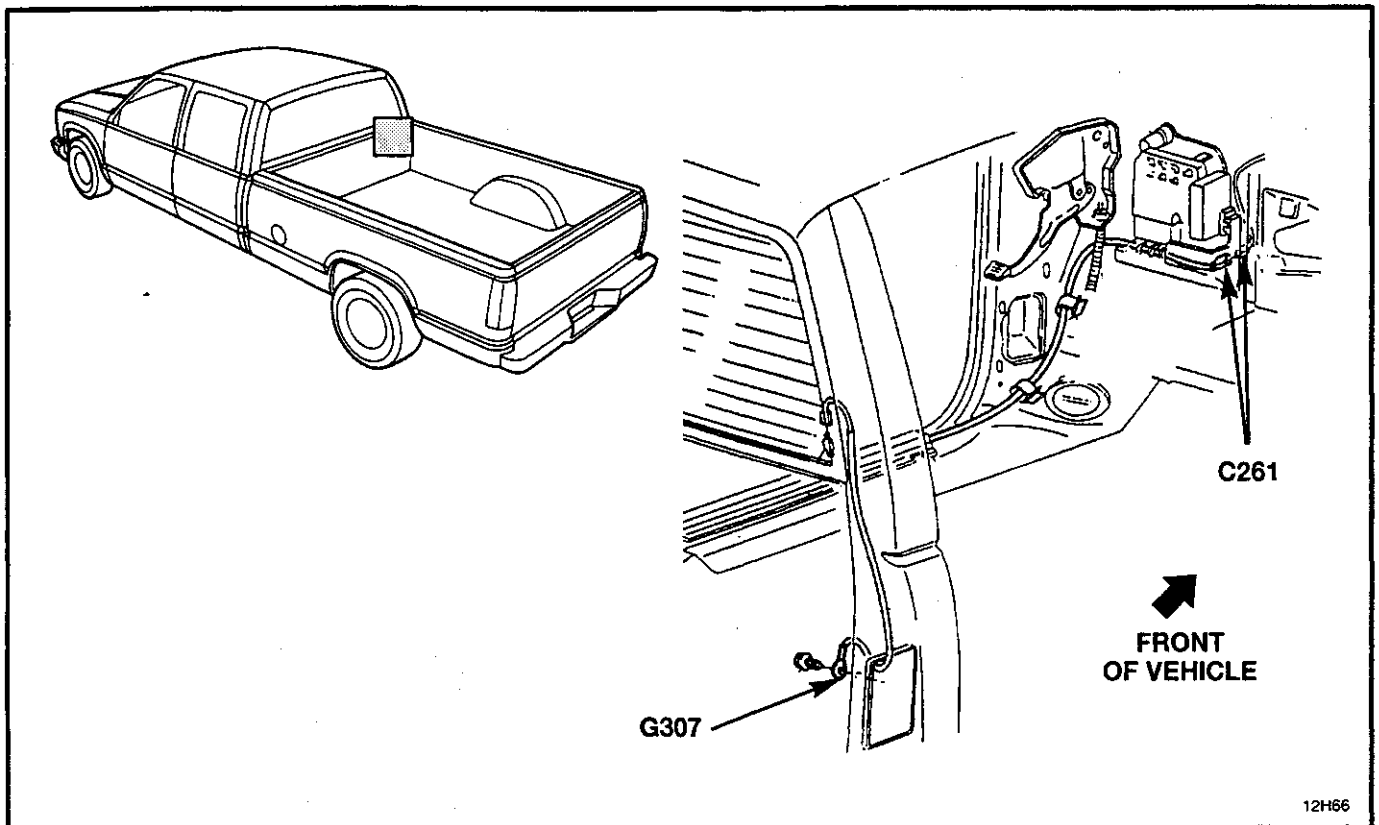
Rear Window Defogger Wiring, 4-Door Cab Shown — Pickup and Extended Cabs Similiar
